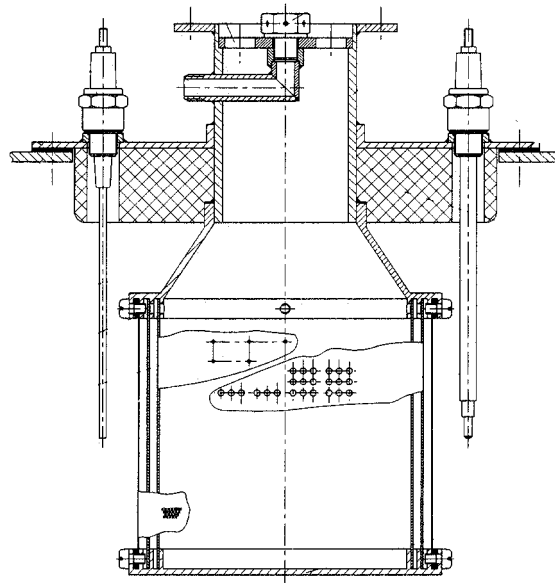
Thermomax cylindrical burner (Ruhrgas)
